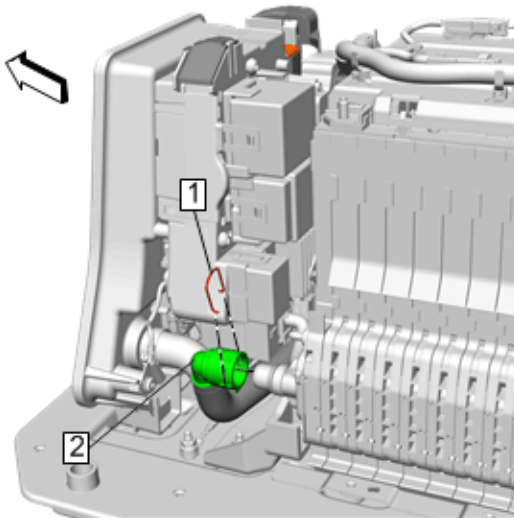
High Voltage Battery Cooling Manifold Outlet Hose And Retainer
